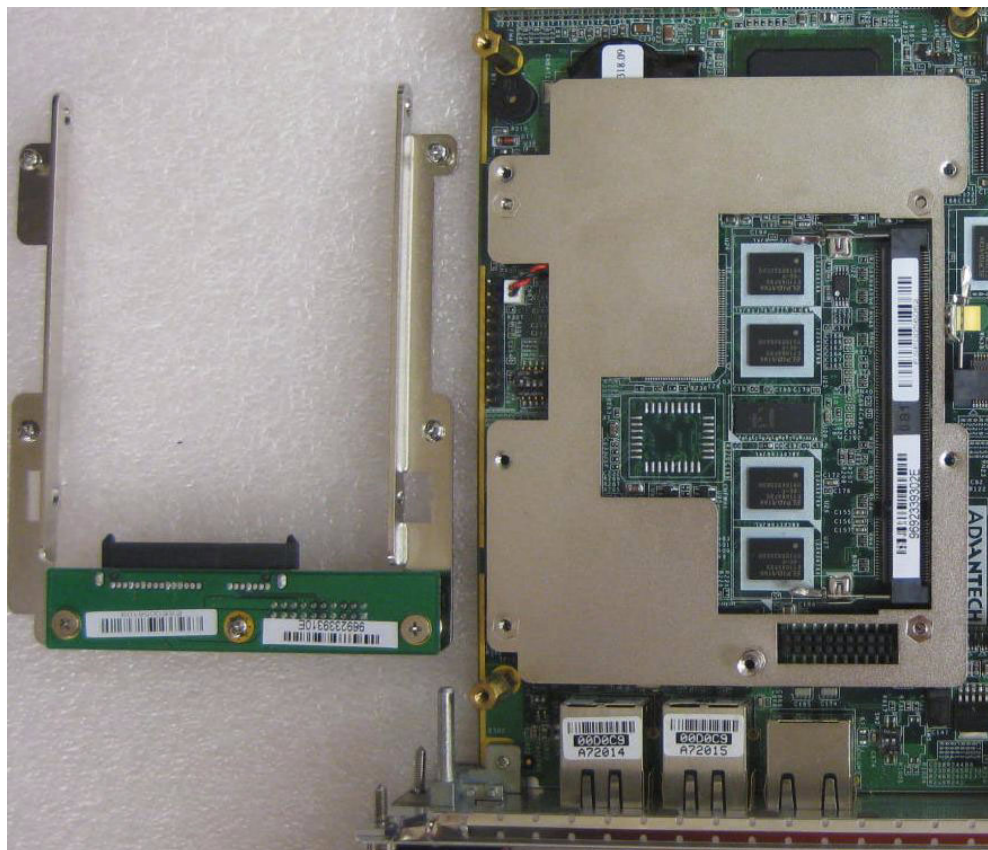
Disassemble SATA HDD Daughter Board and Socket
